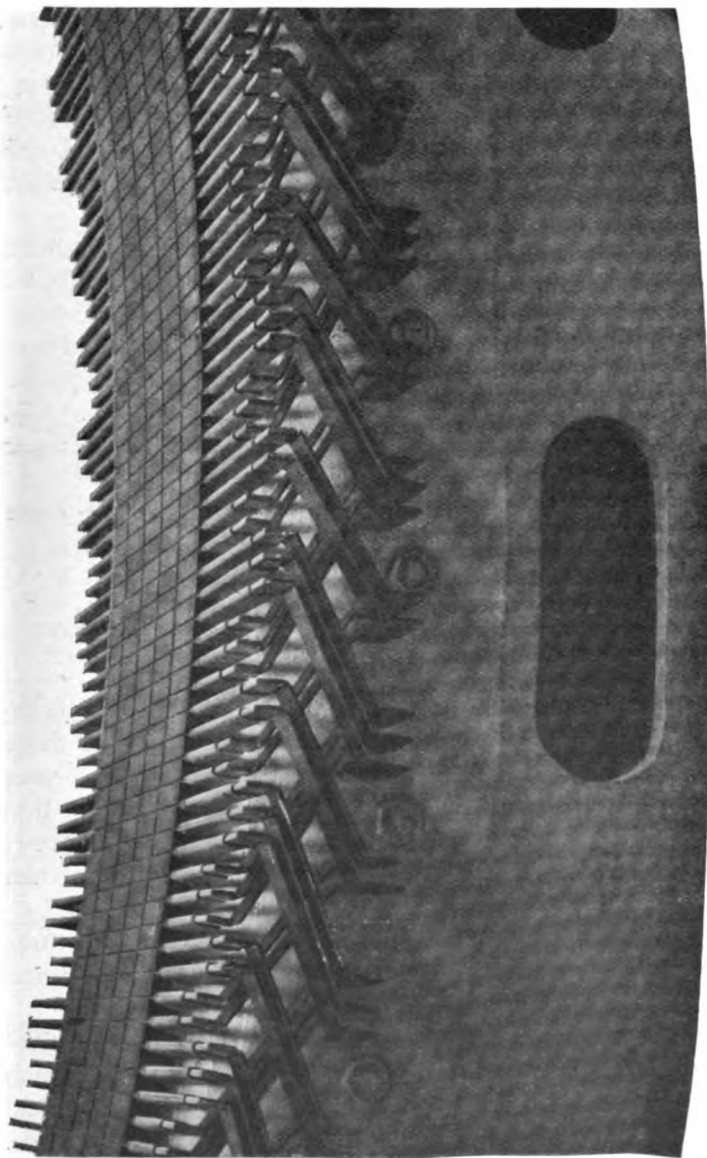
BAR WINDING ON KOLBEN 1500 KW THREE-PHASE GENERATOR, 3000 VOLTS, 94 RPM, 64 POLES, COUPLED DIRECTLY TO GAS ENGINE.
